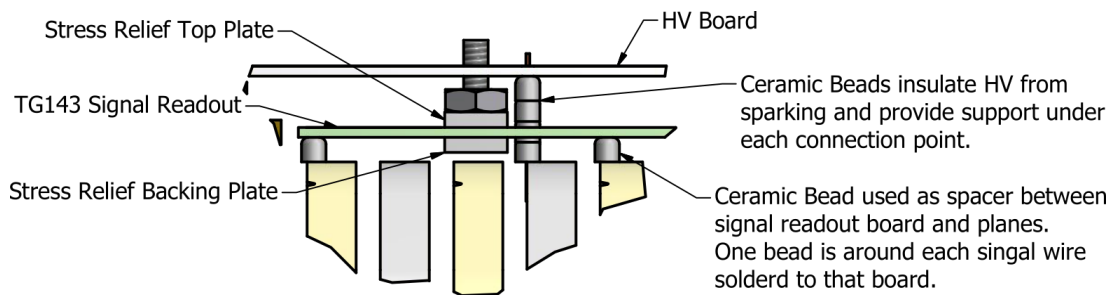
CAD model of the ceramic beads used to space the signal and HV PCBs from the wire frames. The stress relieving plates are used to clamp the Kapton ribbon cables to the signal PCBs to prevent damage to the solder joint and traces during installation.
